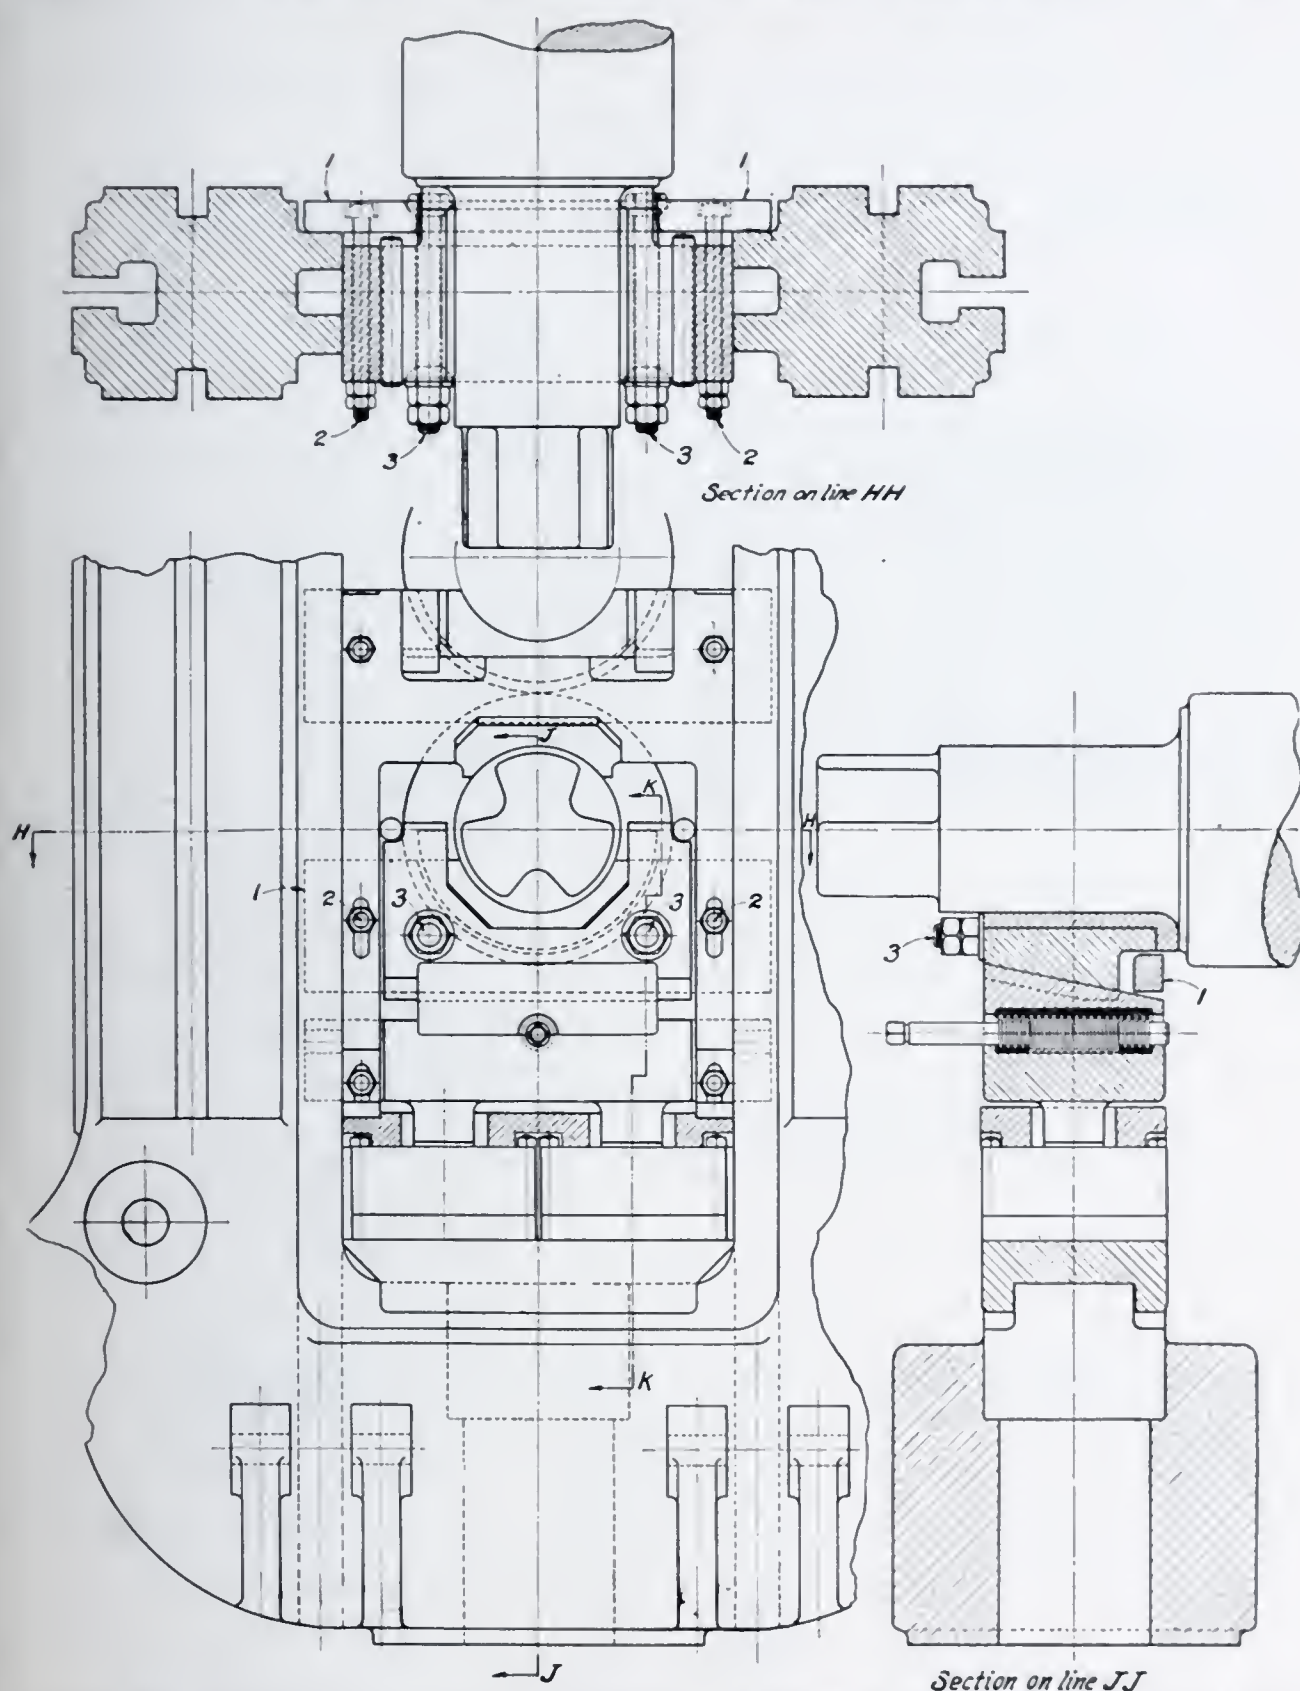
Hydraulic Support Cylinders Applied to Three-High Bar Mill.
